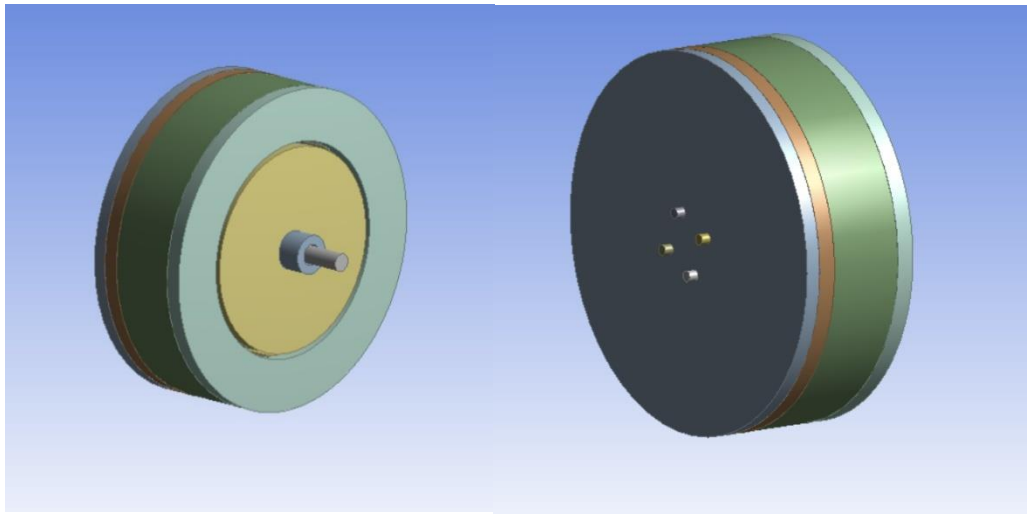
3D Model of Electro-magnetic Braking System.
